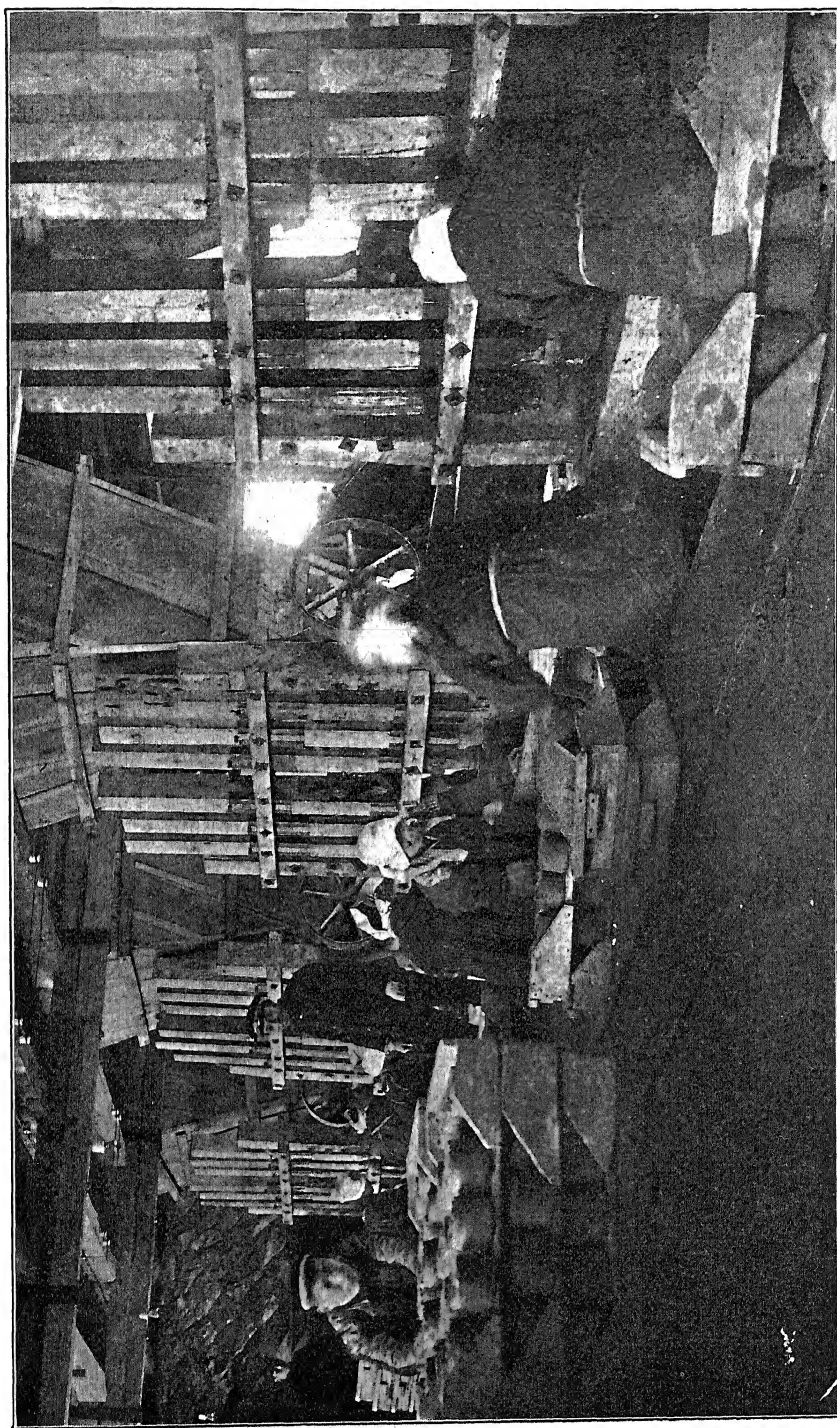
WOODEN STAMPS USED AT KANO WORKS FOR MAKING BRIQUETS.
